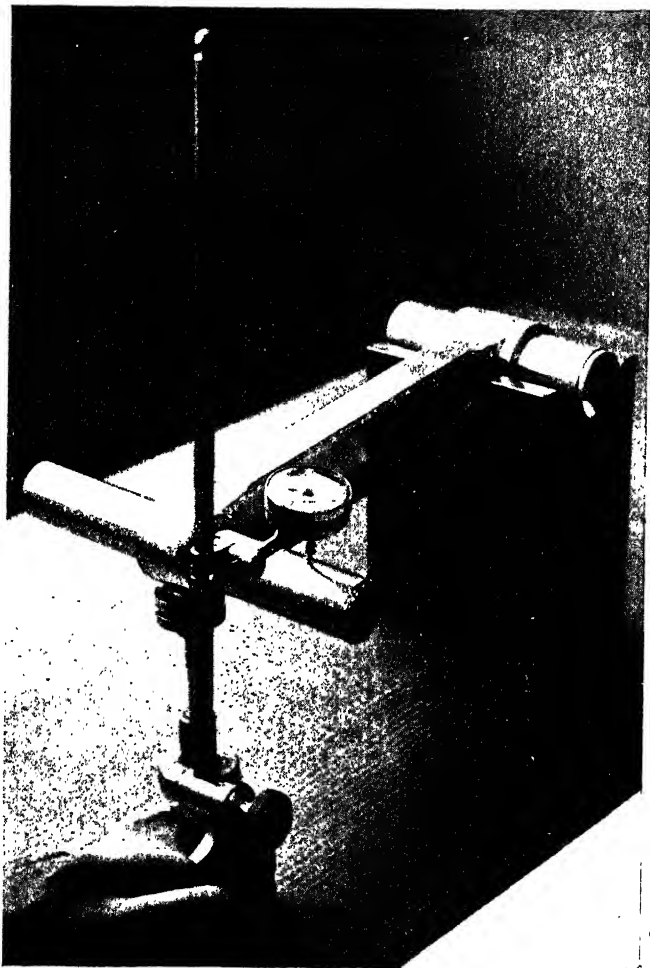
CHECKING ARTICULATED ROD FOR TWIST
